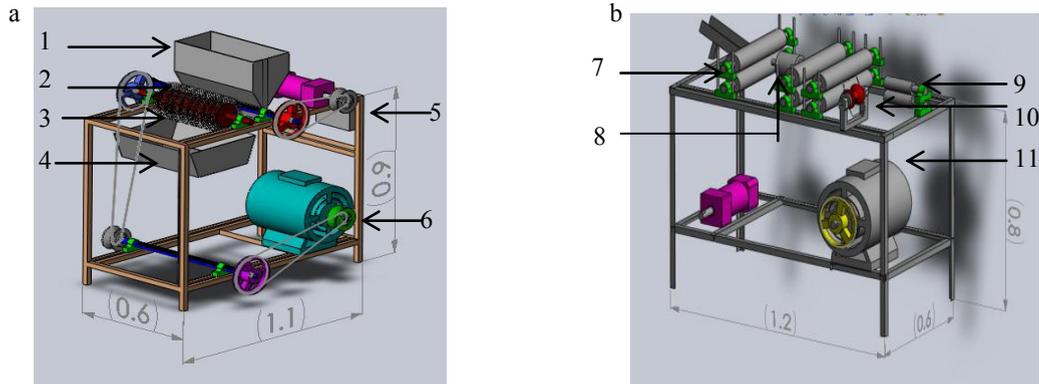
(a) Drawing of carding machine (m); (b) Drawing of twisting machine (m).
